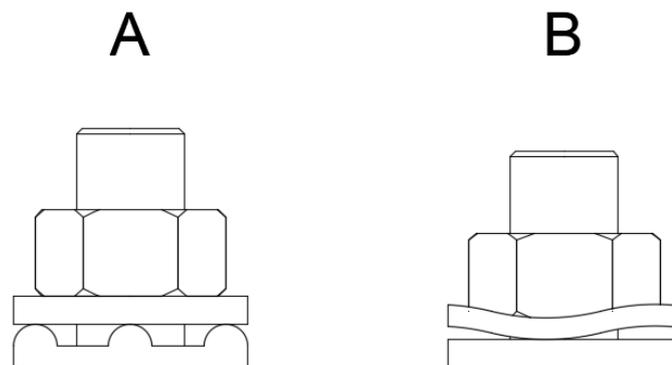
Direct tension indicator washer (A) and bolt (B). DTI washer has bumps on its surface and DTI bolt has a flange head. Both bumps and a flange head will indicate the amount of preload in the joint when tightening. [3]
